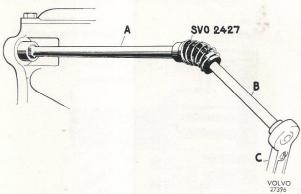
Removing the gearbox bolts, vehicles with B 18 engine
